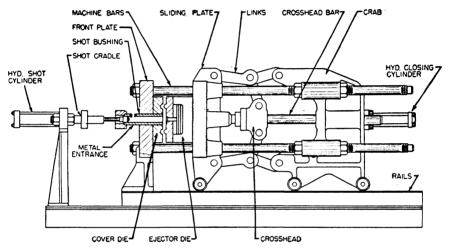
Small (21-in.) submerged-plunger machine having a hydraulically operated toggle mechanism that closes the machine and locks the die in place.
